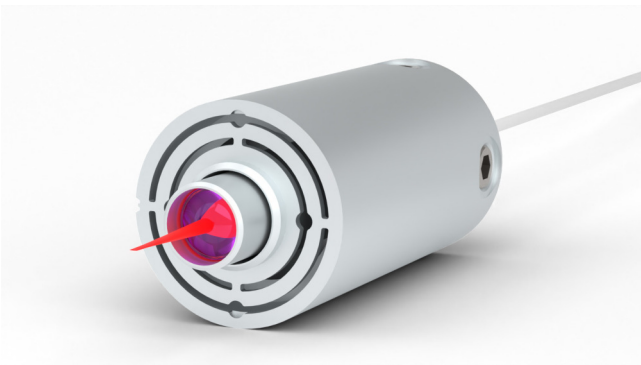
CAD drawing of the sensor head L01 (General tolerances: ISO 2768-fH).
